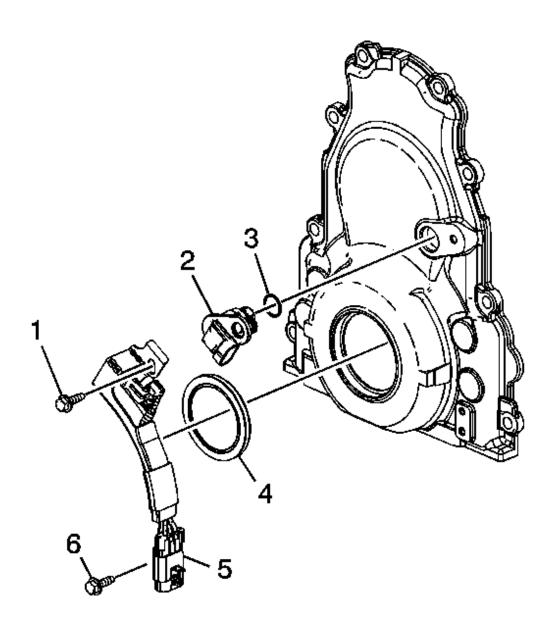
View Of Front Cover, Oil Seal, Camshaft Position Sensor, Bracket & O Ring Courtesy of GENERAL MOTORS CORP.
